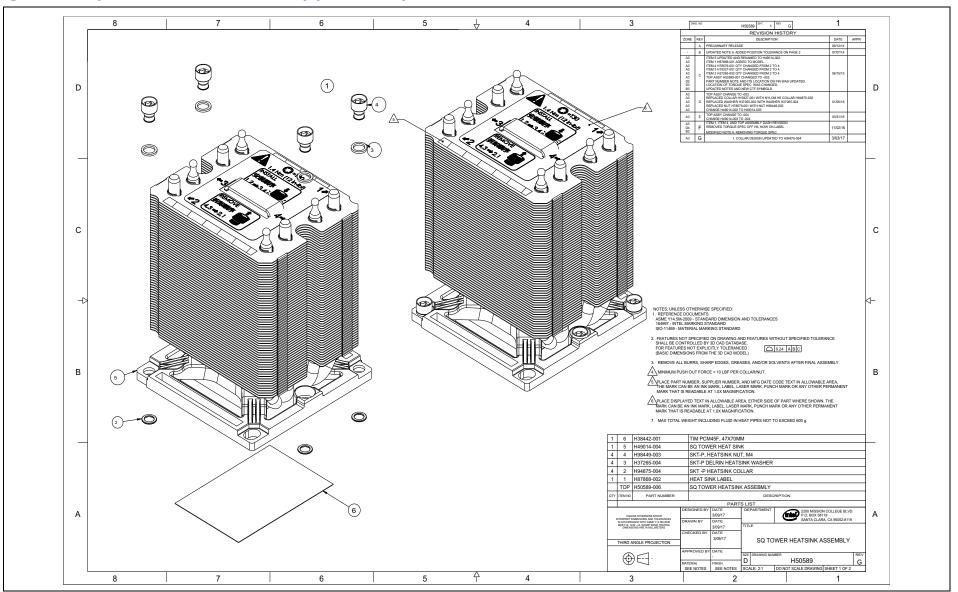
Square Tower Heatsink Assembly (Sheet 2 of 2)
